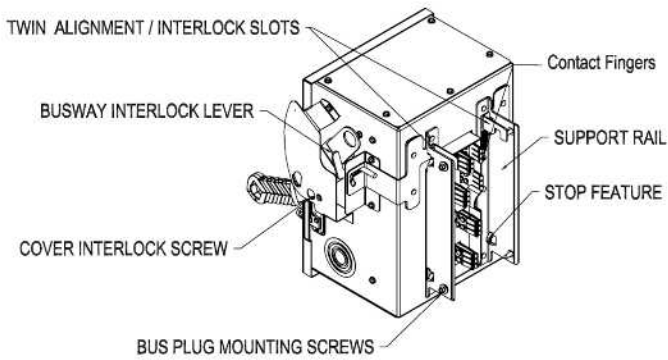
SENTRON SLVBR Bus Plug (Rear View)
